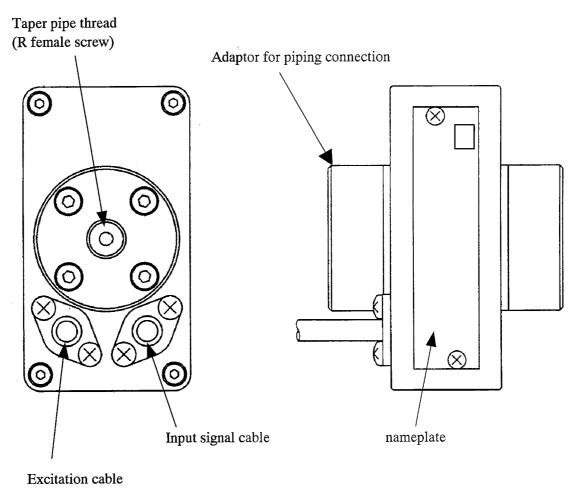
Outline drawing of LF470 Flowmeter Detector
